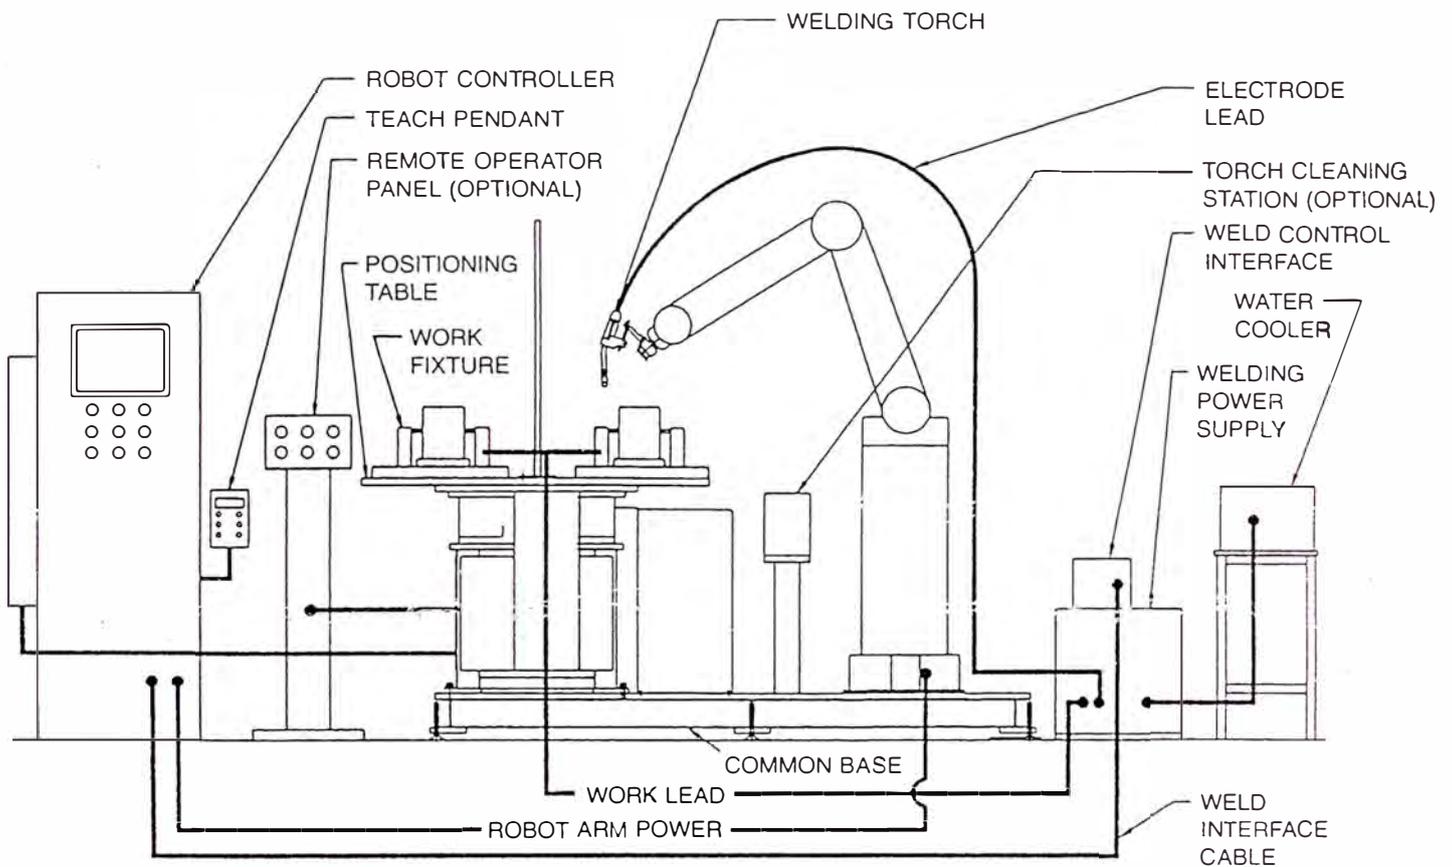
Typical Robotic Arc Welding Arrangement
